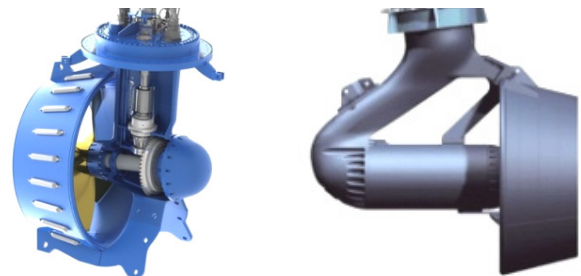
Typical configuration of azimuth thrusters (bevel gear type-left, motor inside type-right)
